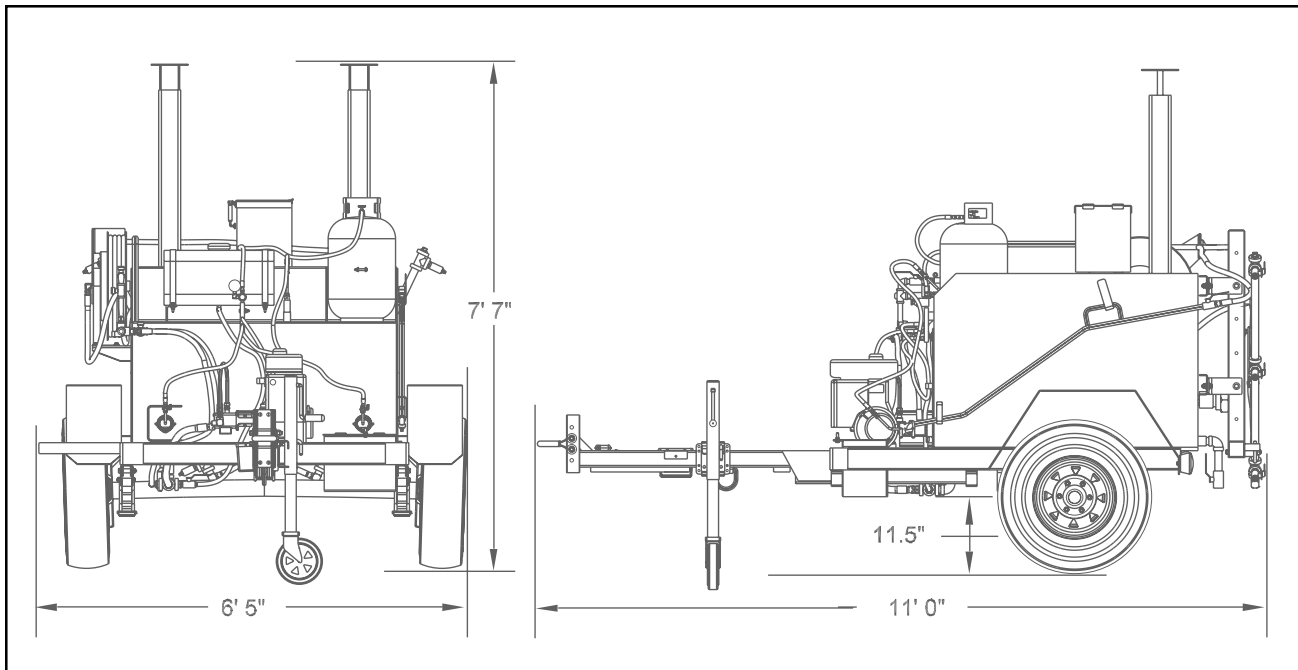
OUTLINE DIMENSIONAL DRAWING - L250T
